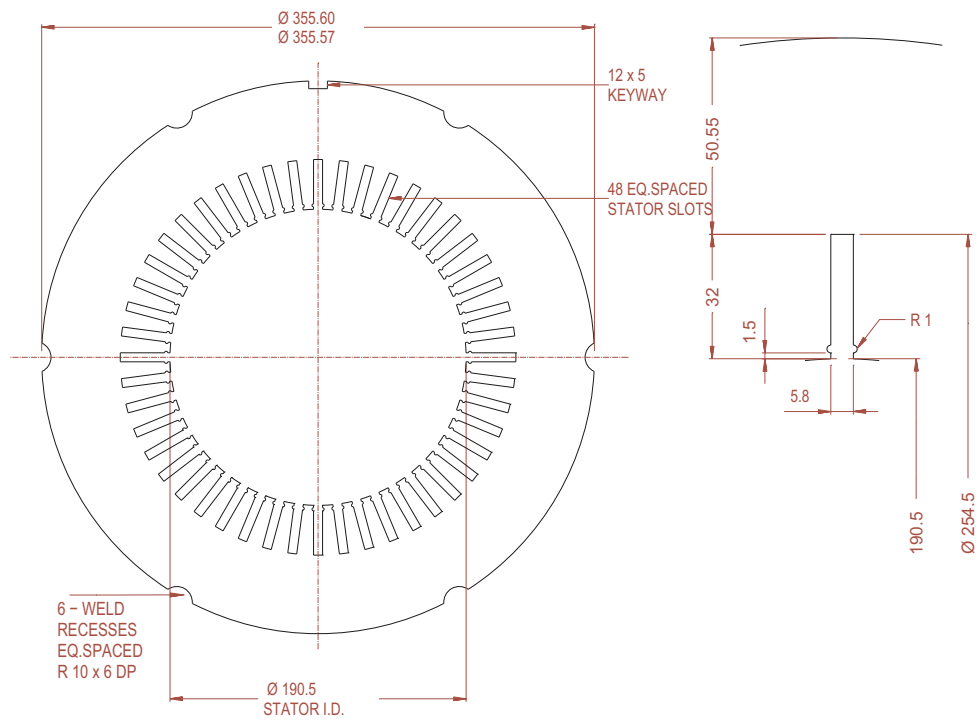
Drawing showing dimensions of the stator of the mini-generator
